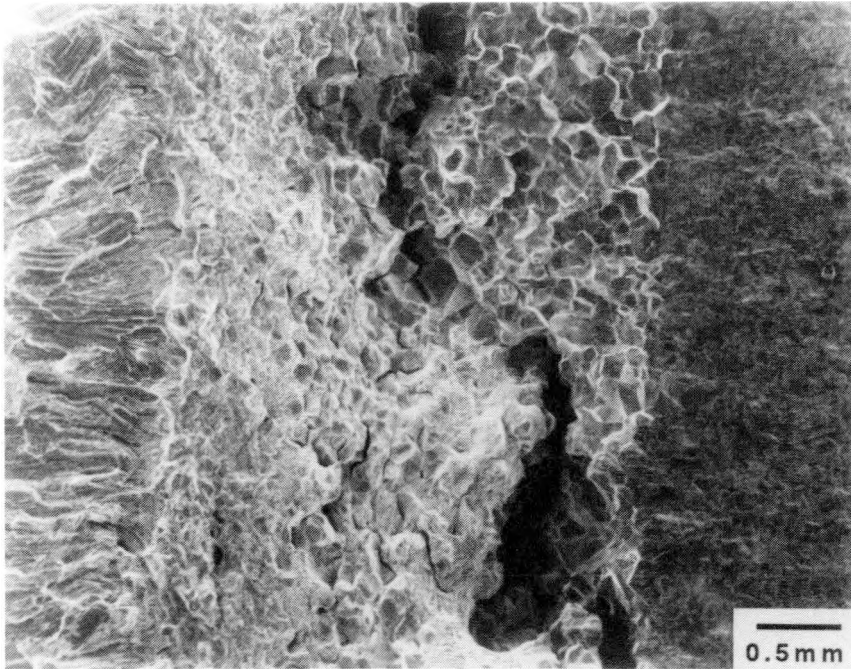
Fracture Surface of 1TCT Weld Overlay Specimen Showing a Branched Intergranular Crack in the Base Material.
